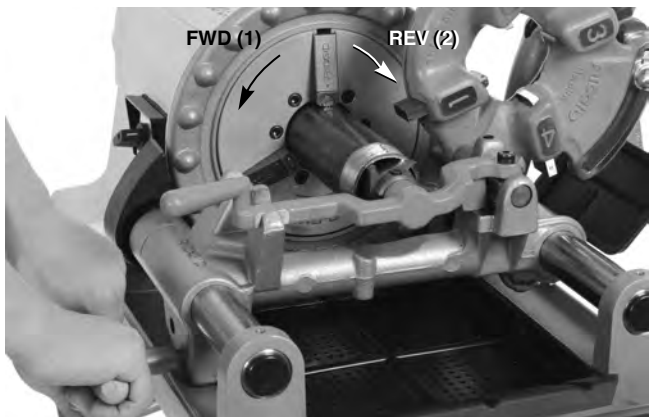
Reaming Pipe with Reamer, Machine Rotation
